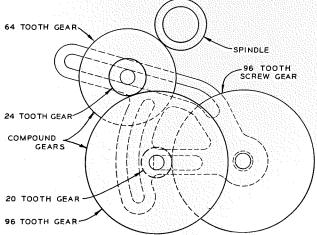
Gear set-up for .0033 inch carriage feed (see page 125).
